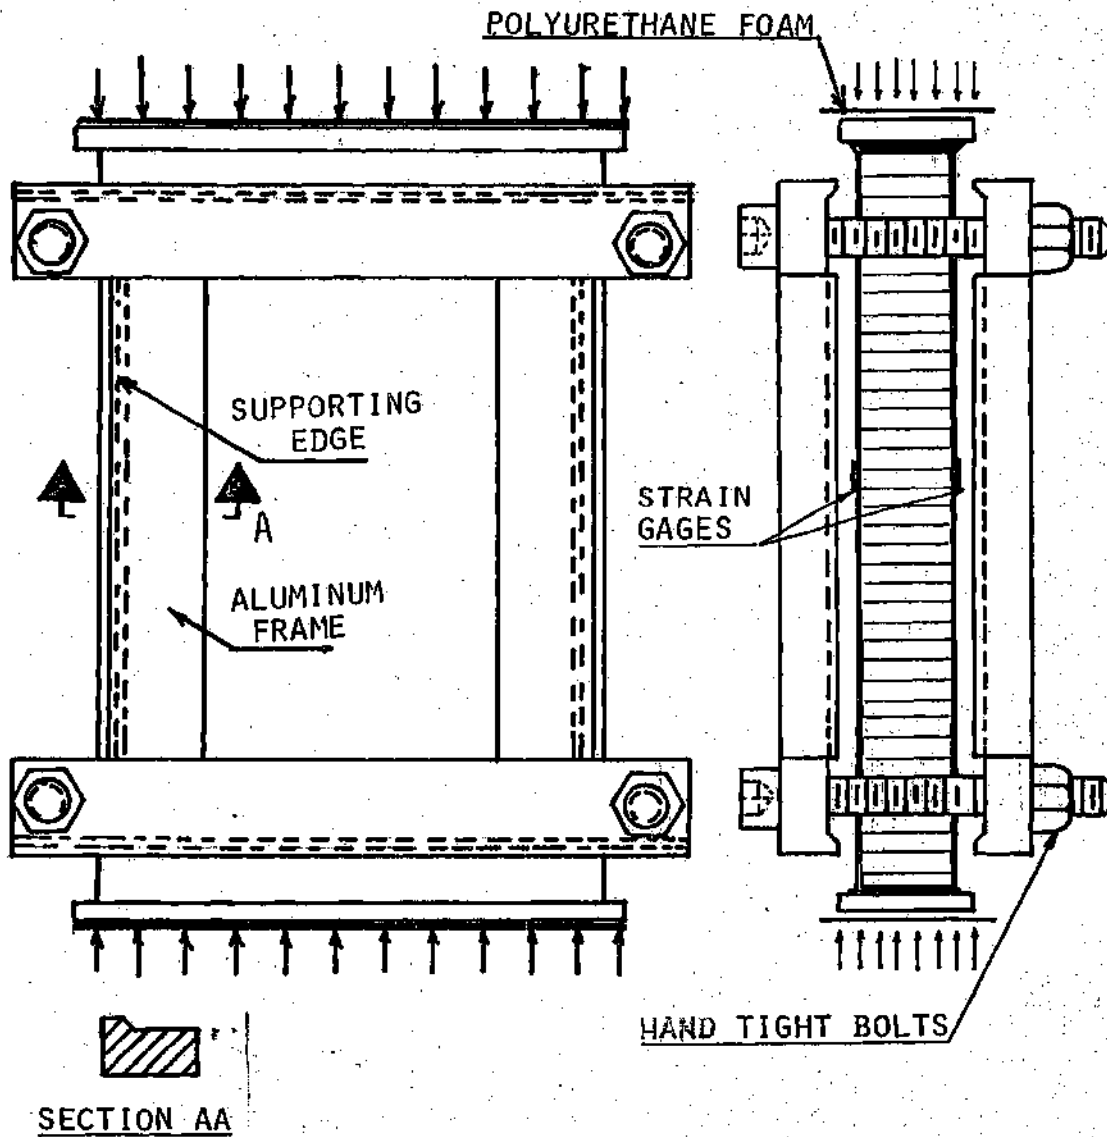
Fixture for Four Edges Simply Supported Test.
